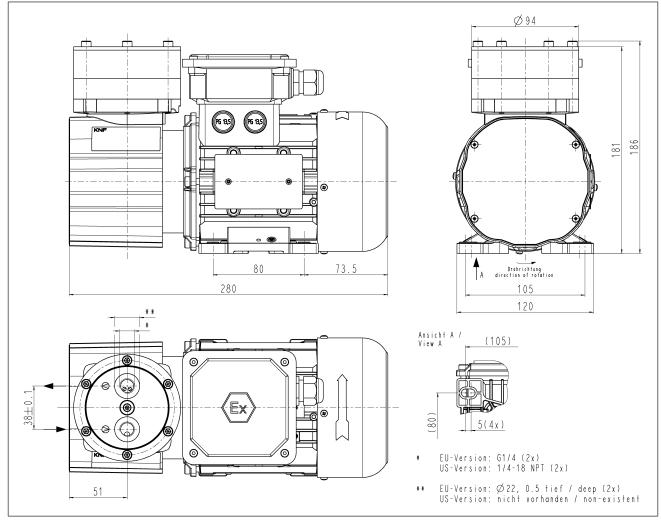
Mounting dimensions of N922FTE EX (three-phase motor)
